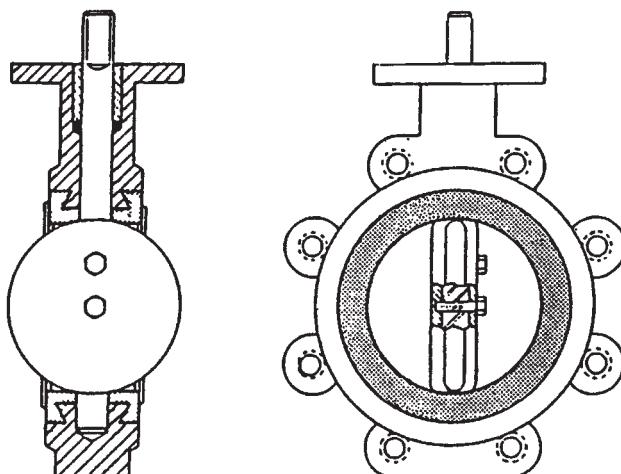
Butterfly valve with encapsulated disc [Courtesy—Keystone Valve].
